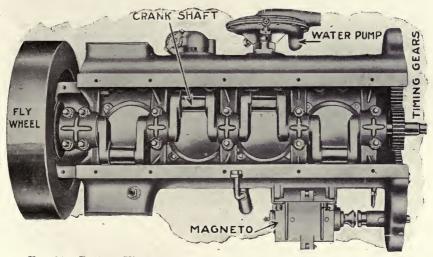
Bottom View of Crank Case having Separate Compartment for Oil.
